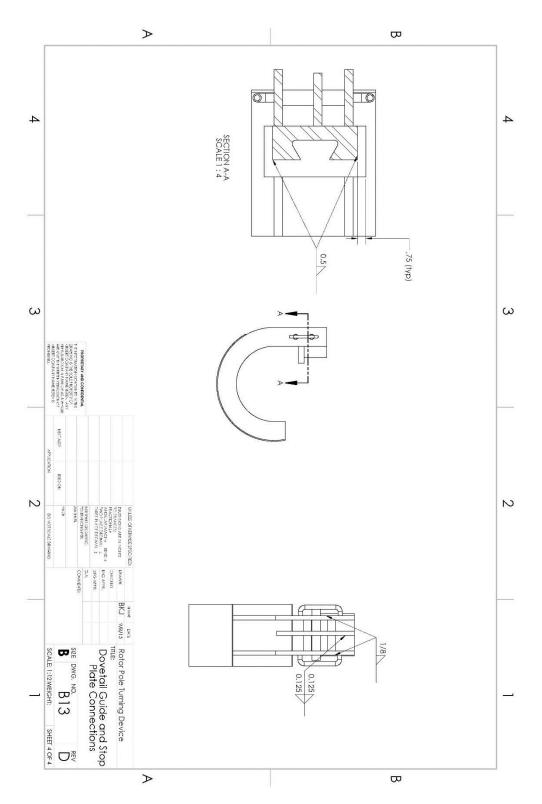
DRAWING OF BARS TO MIDDLE AND SIDE PLATES CONNECTION
